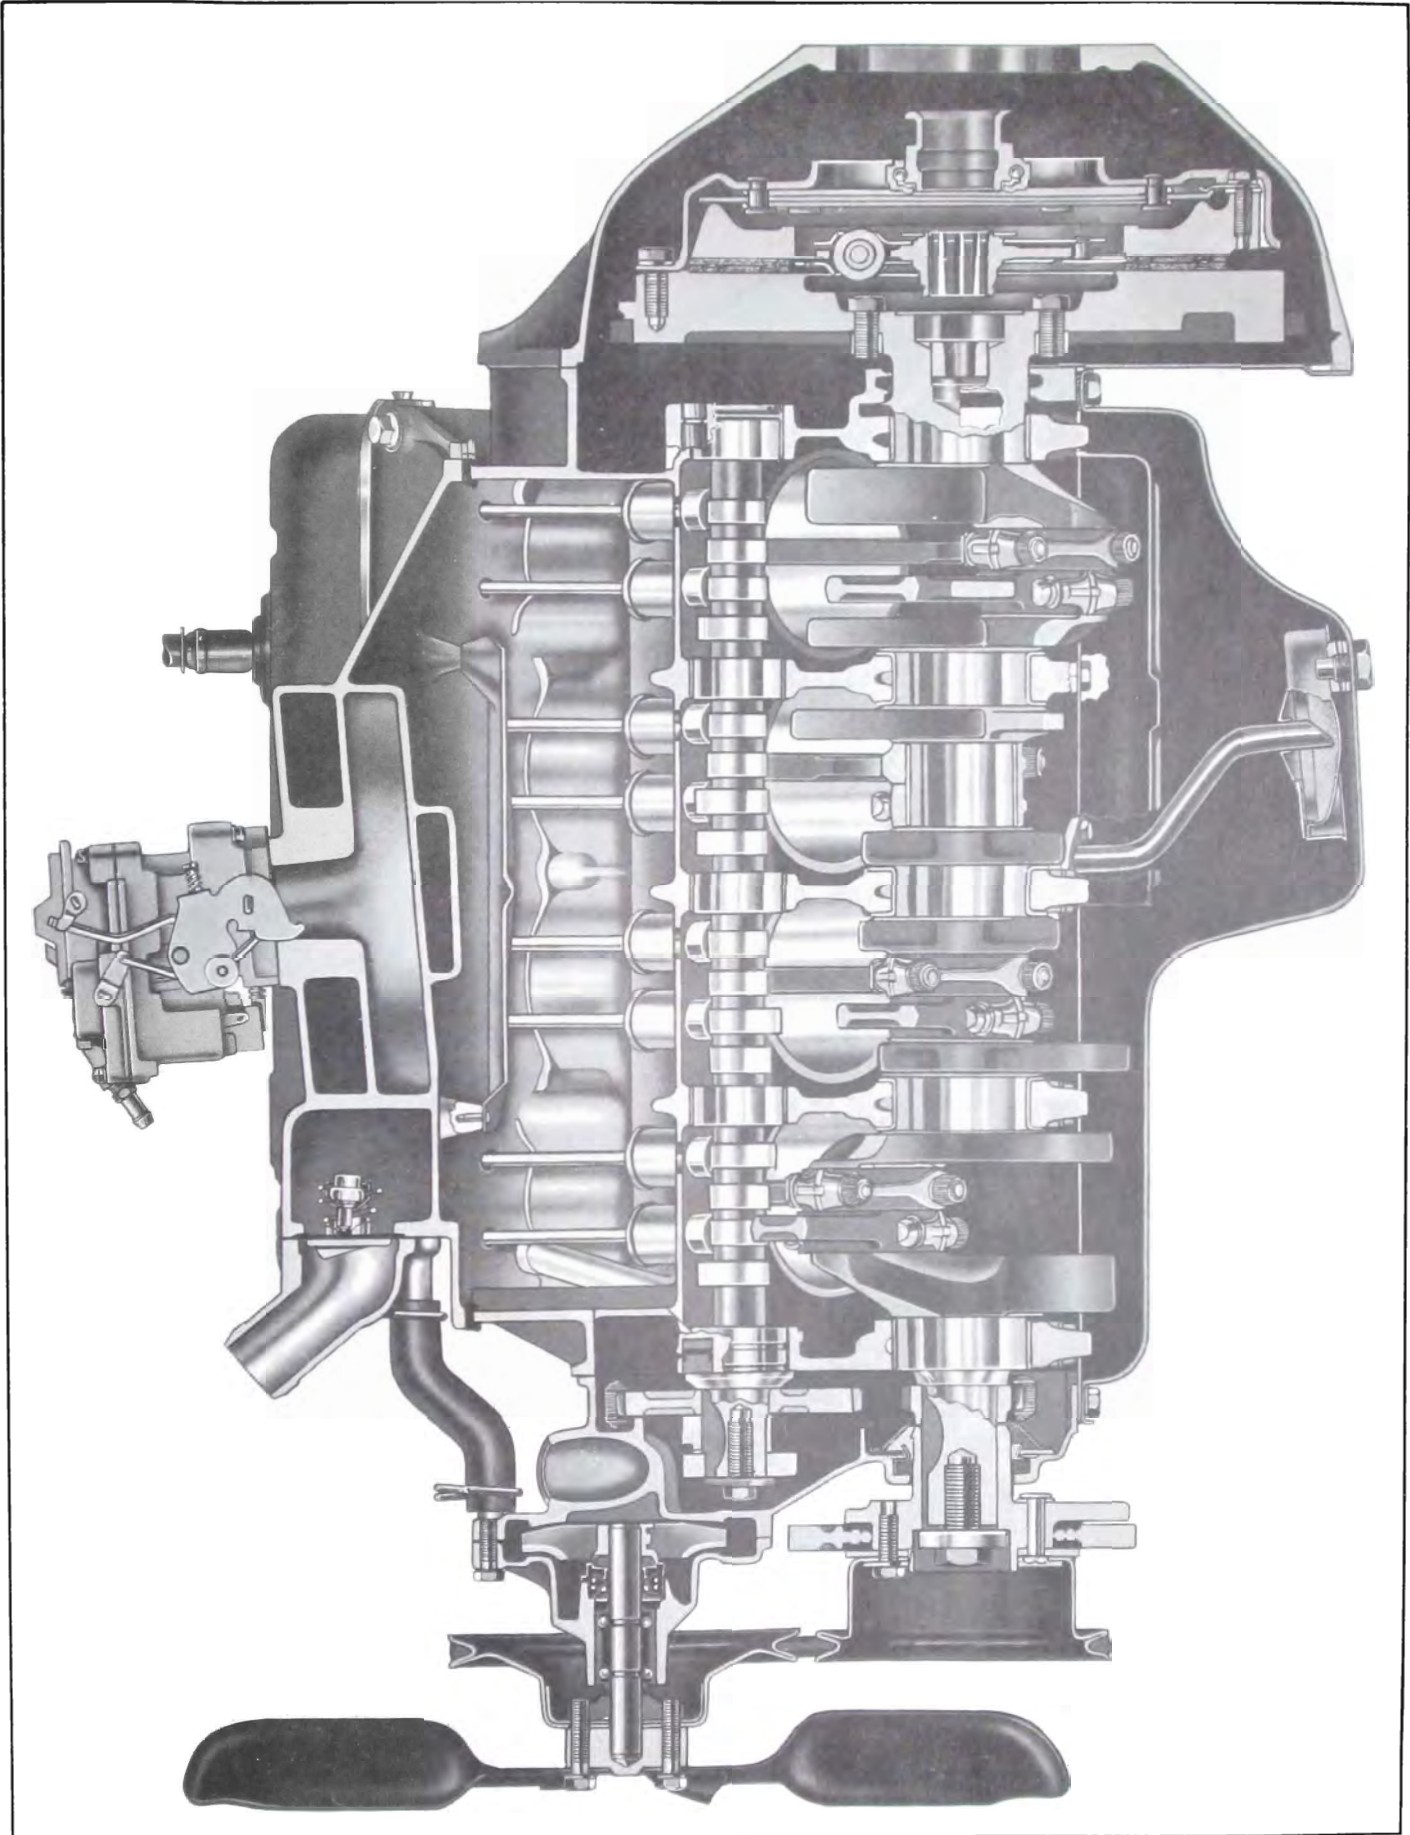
300 Cu. In. Engine Cross Section (Side View)
